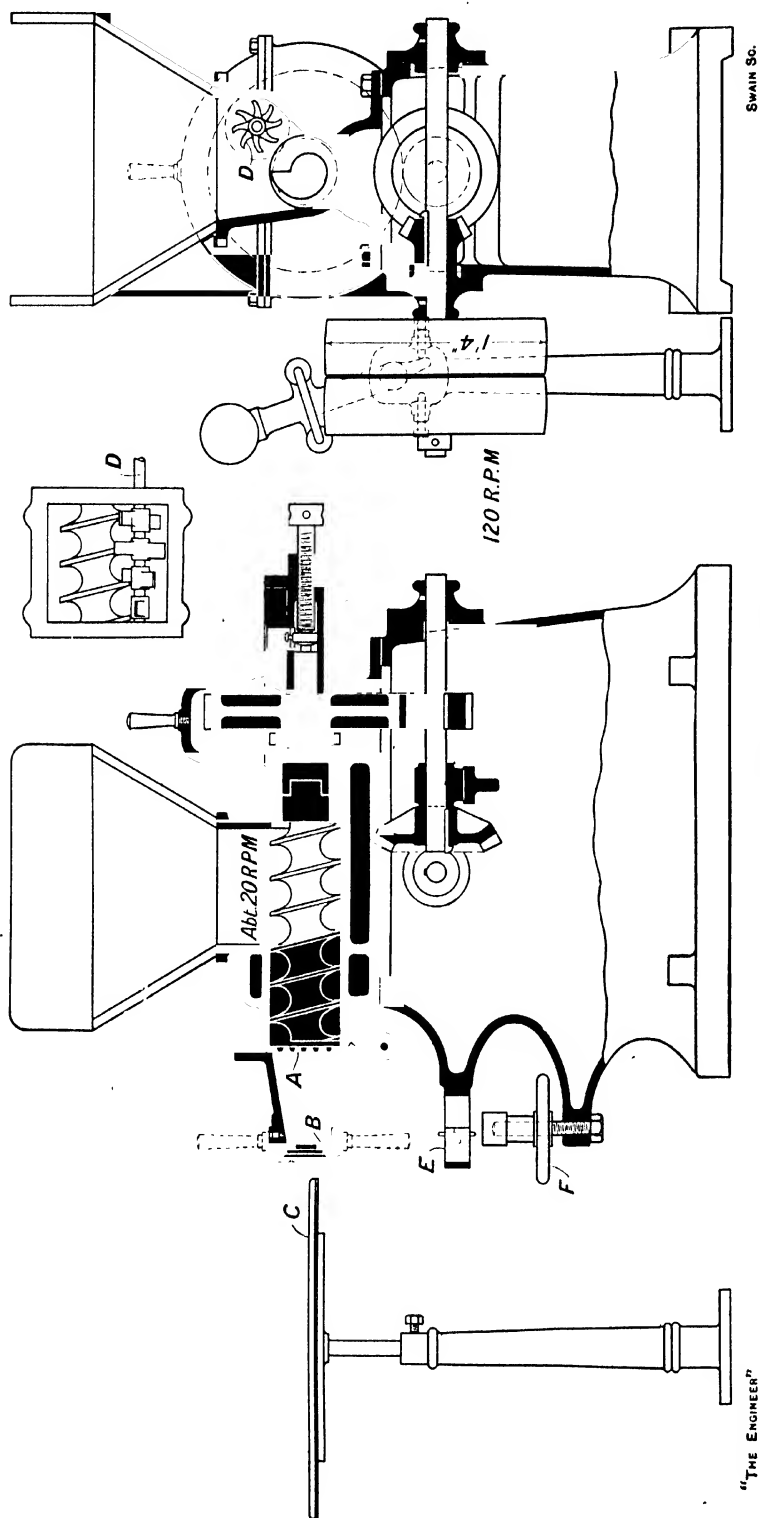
Soap Squeezing Machine or Plodder—Fraser.
